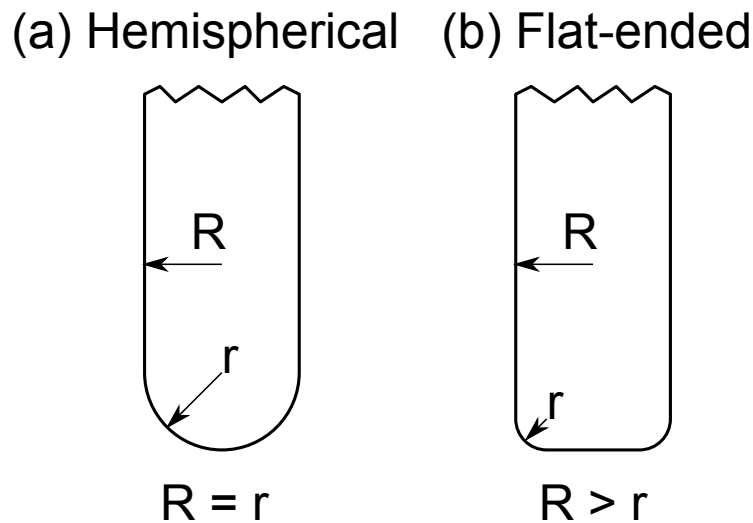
Hemispherical and flat-ended tool cross-sections, including dimensions.
